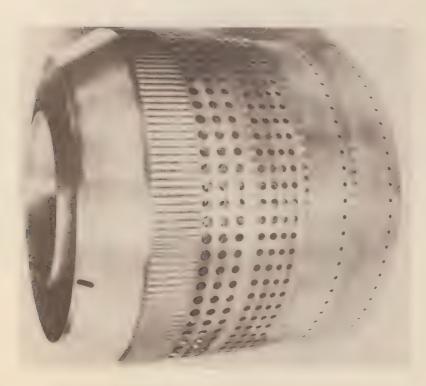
A side view of the combustion changer of the J34 turbojet.
